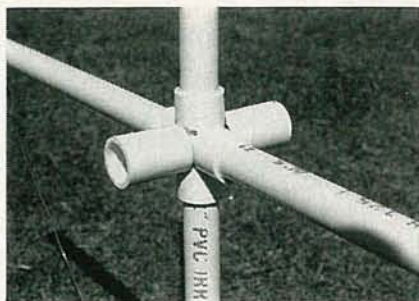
A CLOSEUP VIEW OF THE COUPLING assembly used on the driver and second director elements. Note that the reflector and first director elements have only one coupling cemented to the cross-tee.
